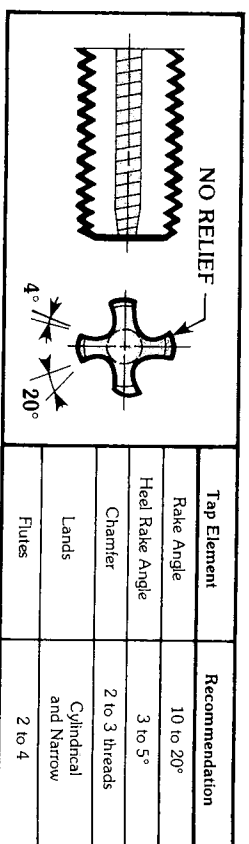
Heel cutting tap for magnesium with no form relief.
